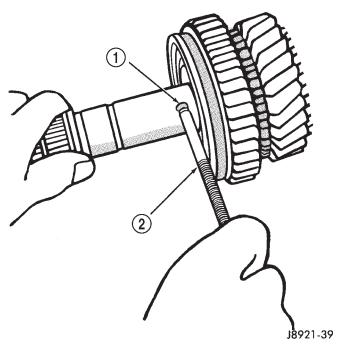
Remove First Gear Bearing Inner Race Lock Ball
